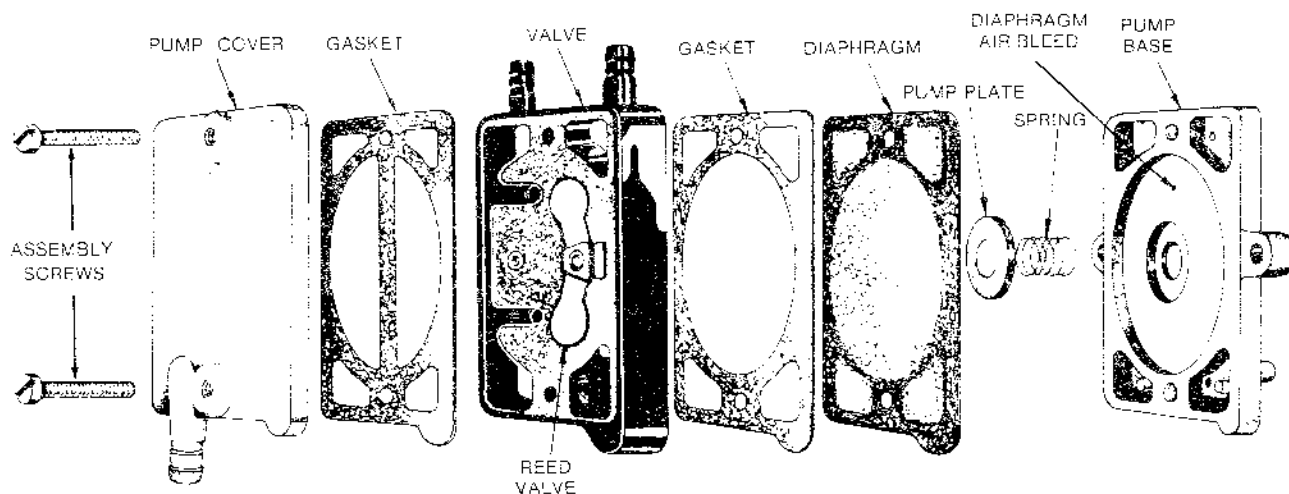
PULSE PUMP - EXPLODED VIEW
